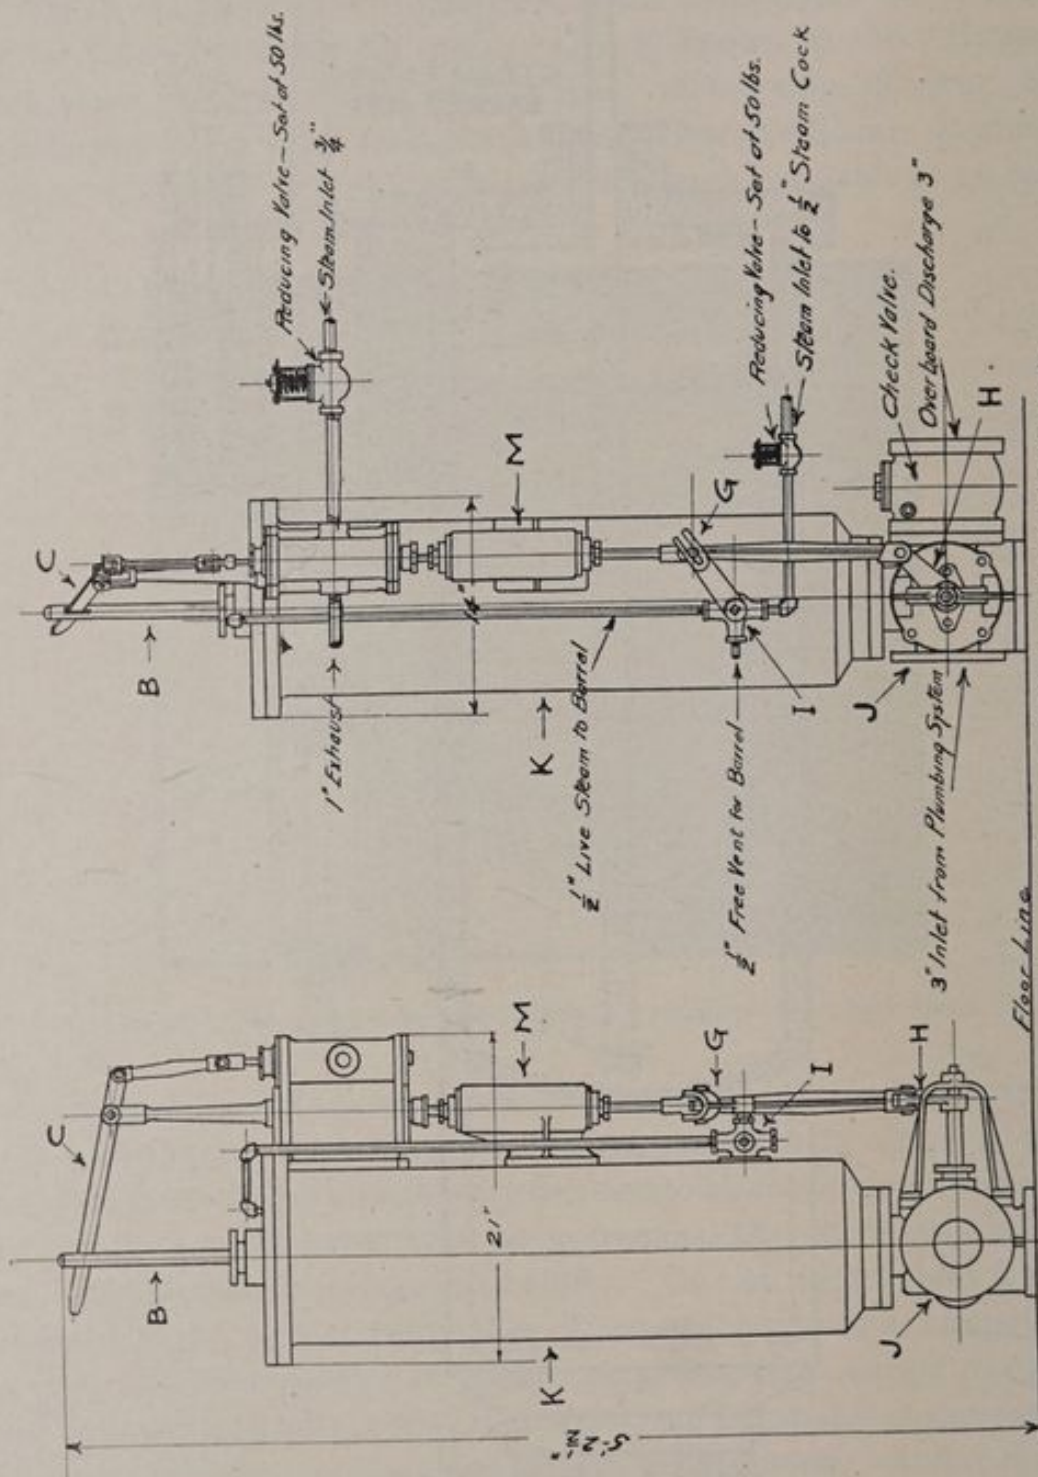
Assembly drawings of Hermes Sewage Discharger.
